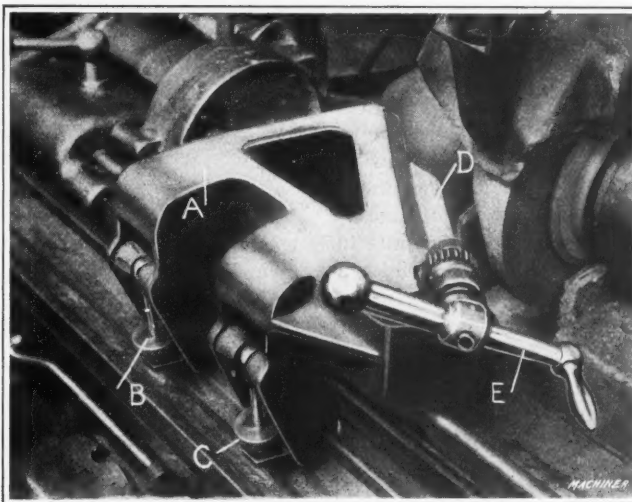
Angular Wheel Truing Device for Use on Plain Cylindrical Grinding Machine
